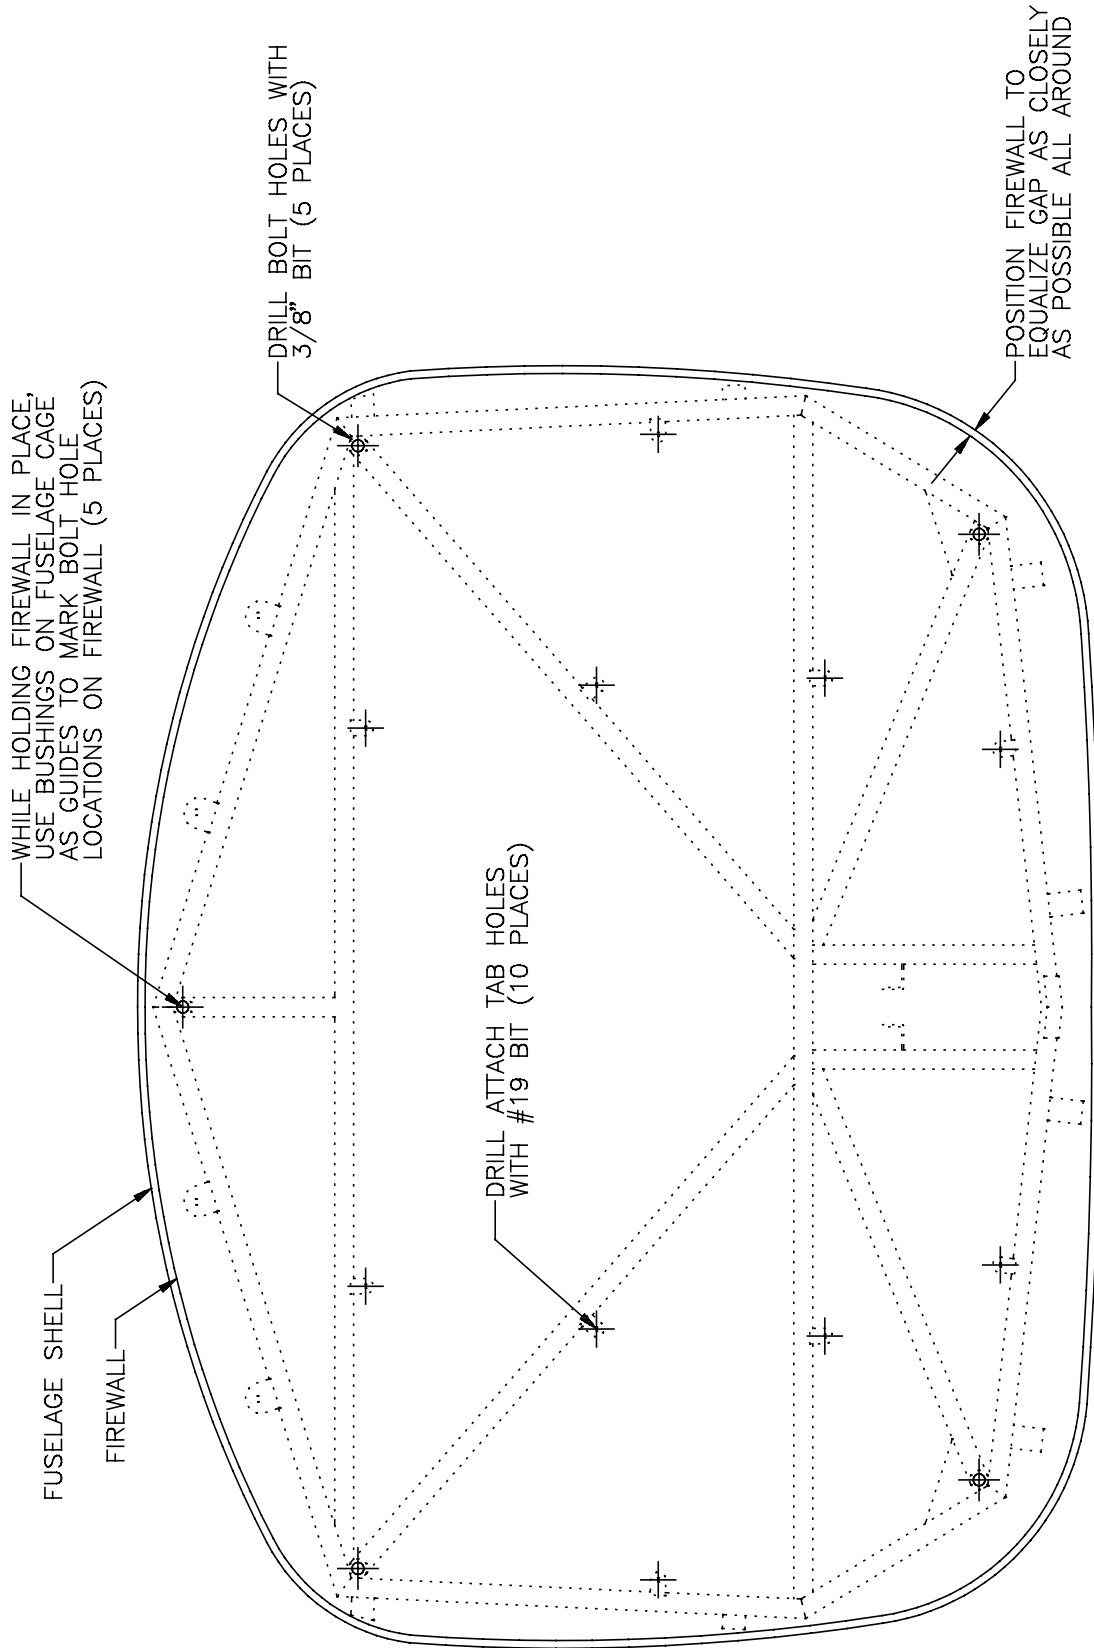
Drilling the Engine Mount Bolt and Attach Tab Holes
